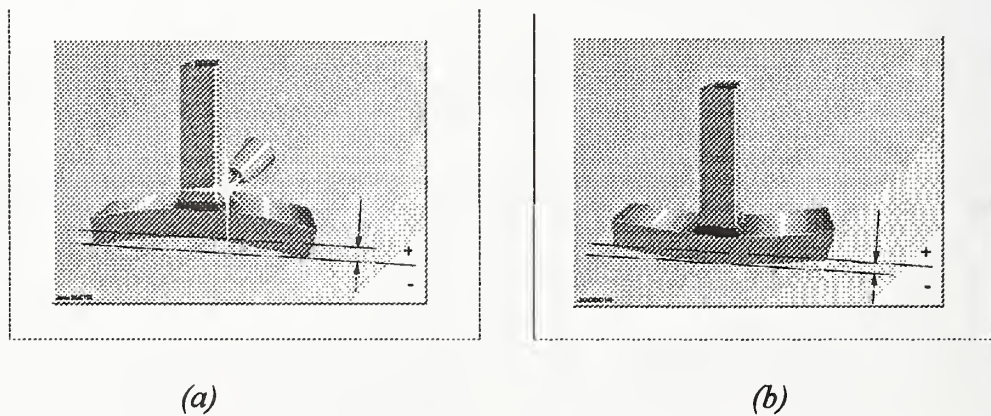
Schematic diagram of deformations in welding of a T-joint. (a) During welding, and (b) after welding is completed.
